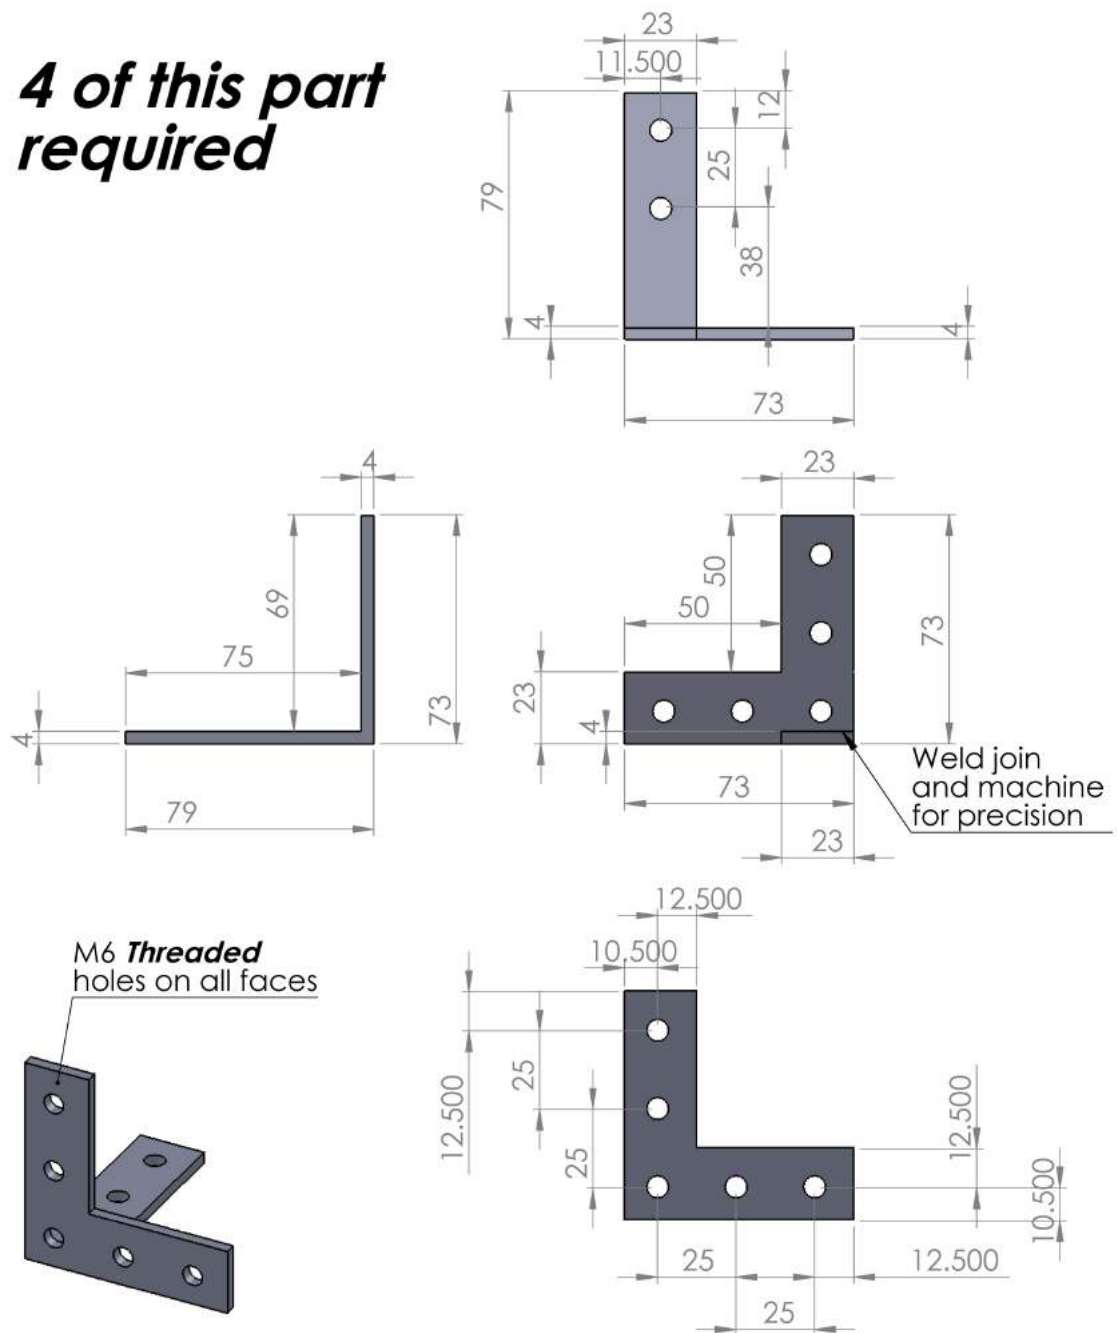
The top corner pieces which secure the corner posts to the top frames of the cage. All holes are threaded because unlike the bottom corners, the experimental table cannot be used to secure the bolts in place.
